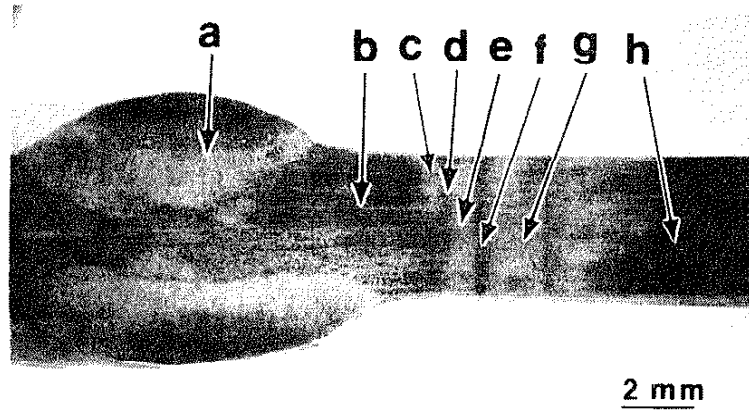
Macrograph and micrograph of cross-section for as-welded (AW) 18 Ni (250) maraging steel. Aging was performed after welding: a) One-pass weld metal, b), c), d), e), f), g) Heat affected zone, h) Base metal.
